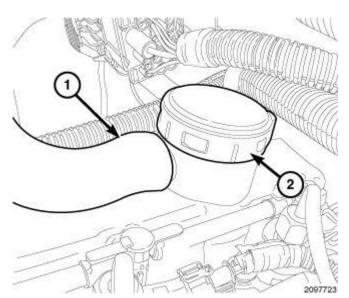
Crankcase Vent Hose & Oil Separator Courtesy of CHRYSLER LLC
